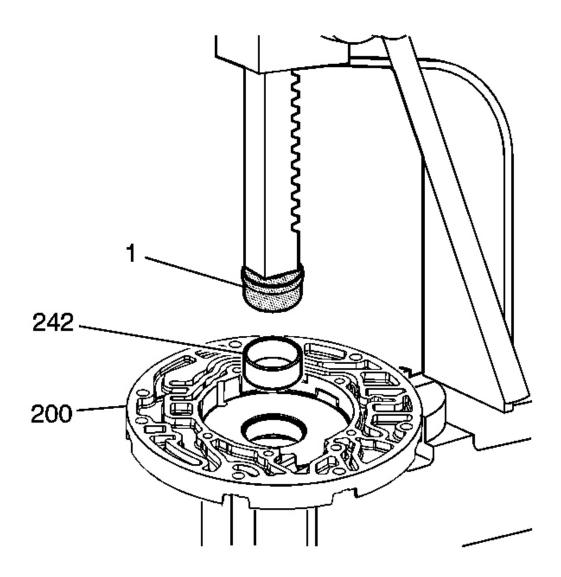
Identifying Pump Body Bushing Courtesy of GENERAL MOTORS CORP.
